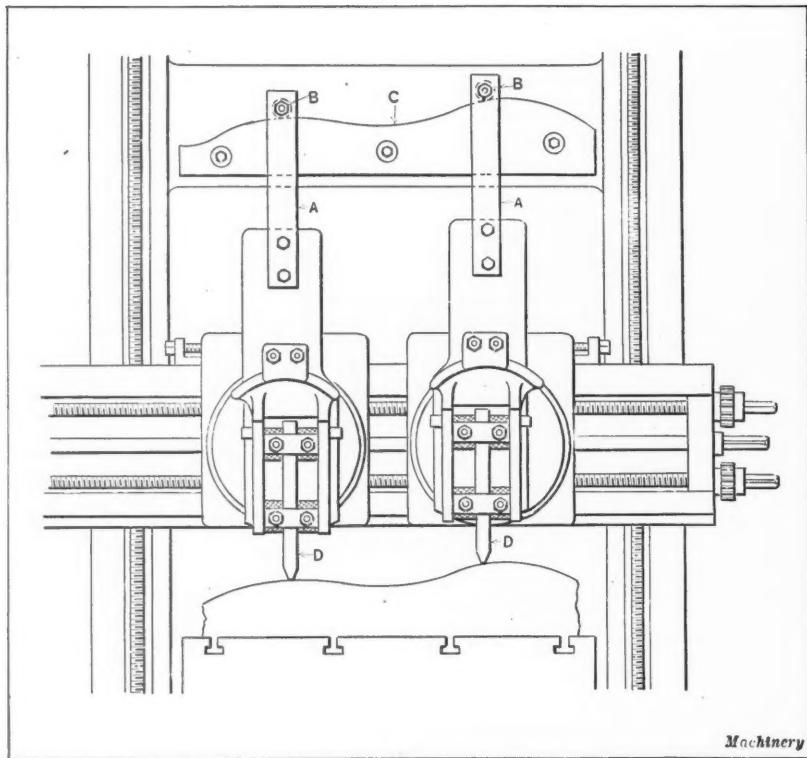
A Planer Radius Attachment used for planing irregularly Curved Cast-iron Beds of Ironing Machines
